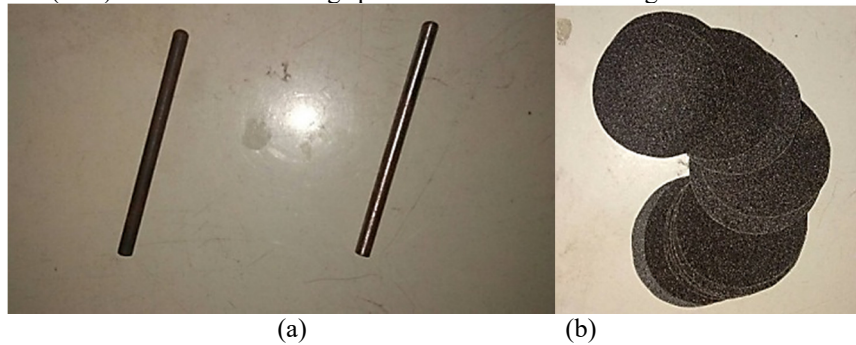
(a) AISI 1526 wear and tear testing specimens in the form of pins (b) Silicon Carbide (SiC) in the form of disk
